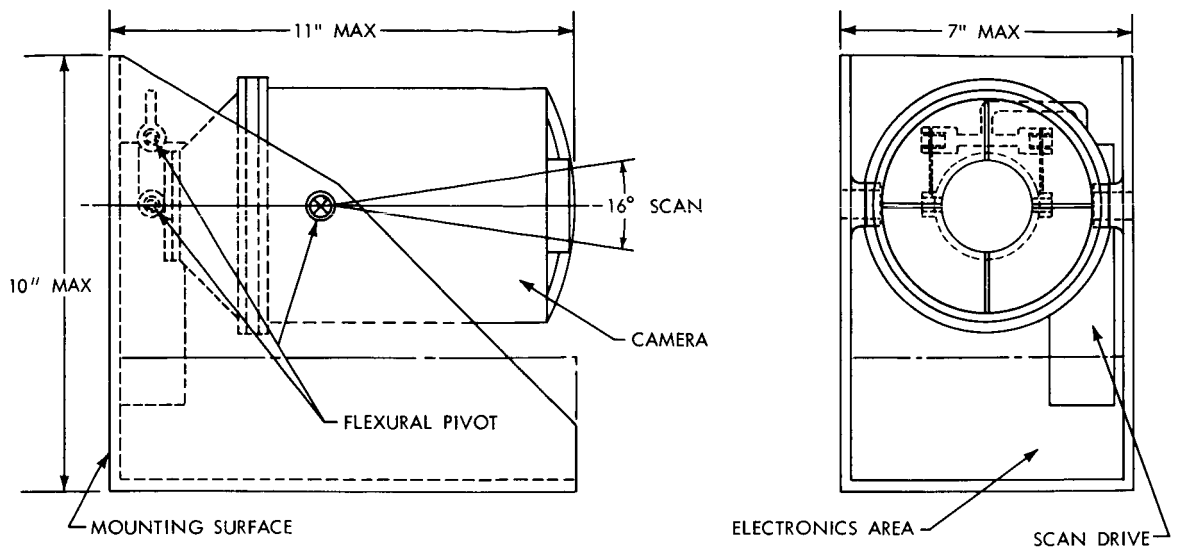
ATS Cloud Camera Outline and Mounting Drawing
